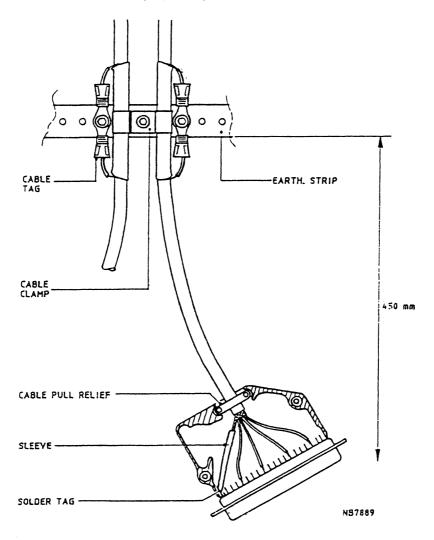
2 Connection cables mounted to the rack.
